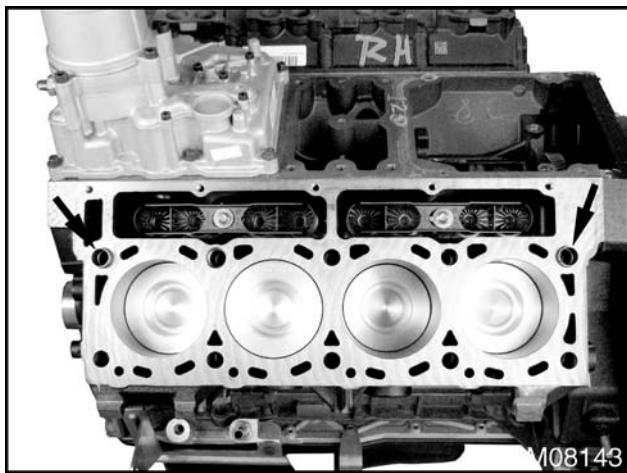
Cylinder head spring dowel pins in crankcase (typical)
